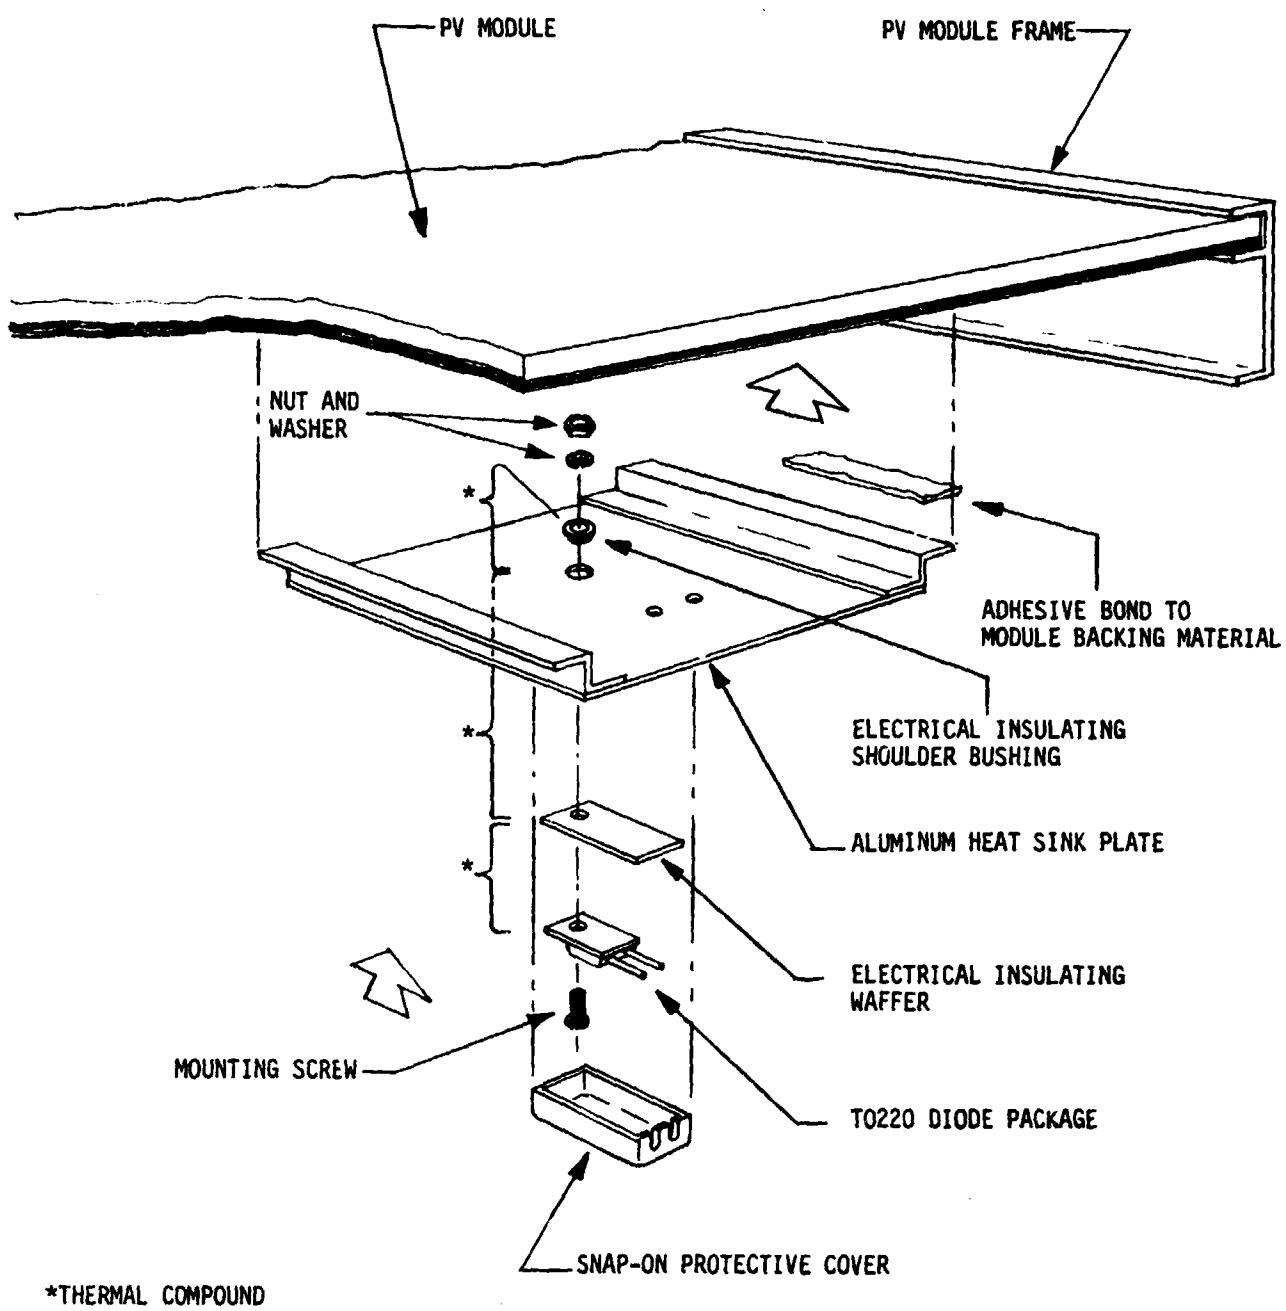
TO220 Diode Package Mounted to Back of PV Module
